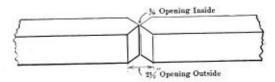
Frame Cut Out the Proper Way for Welding
